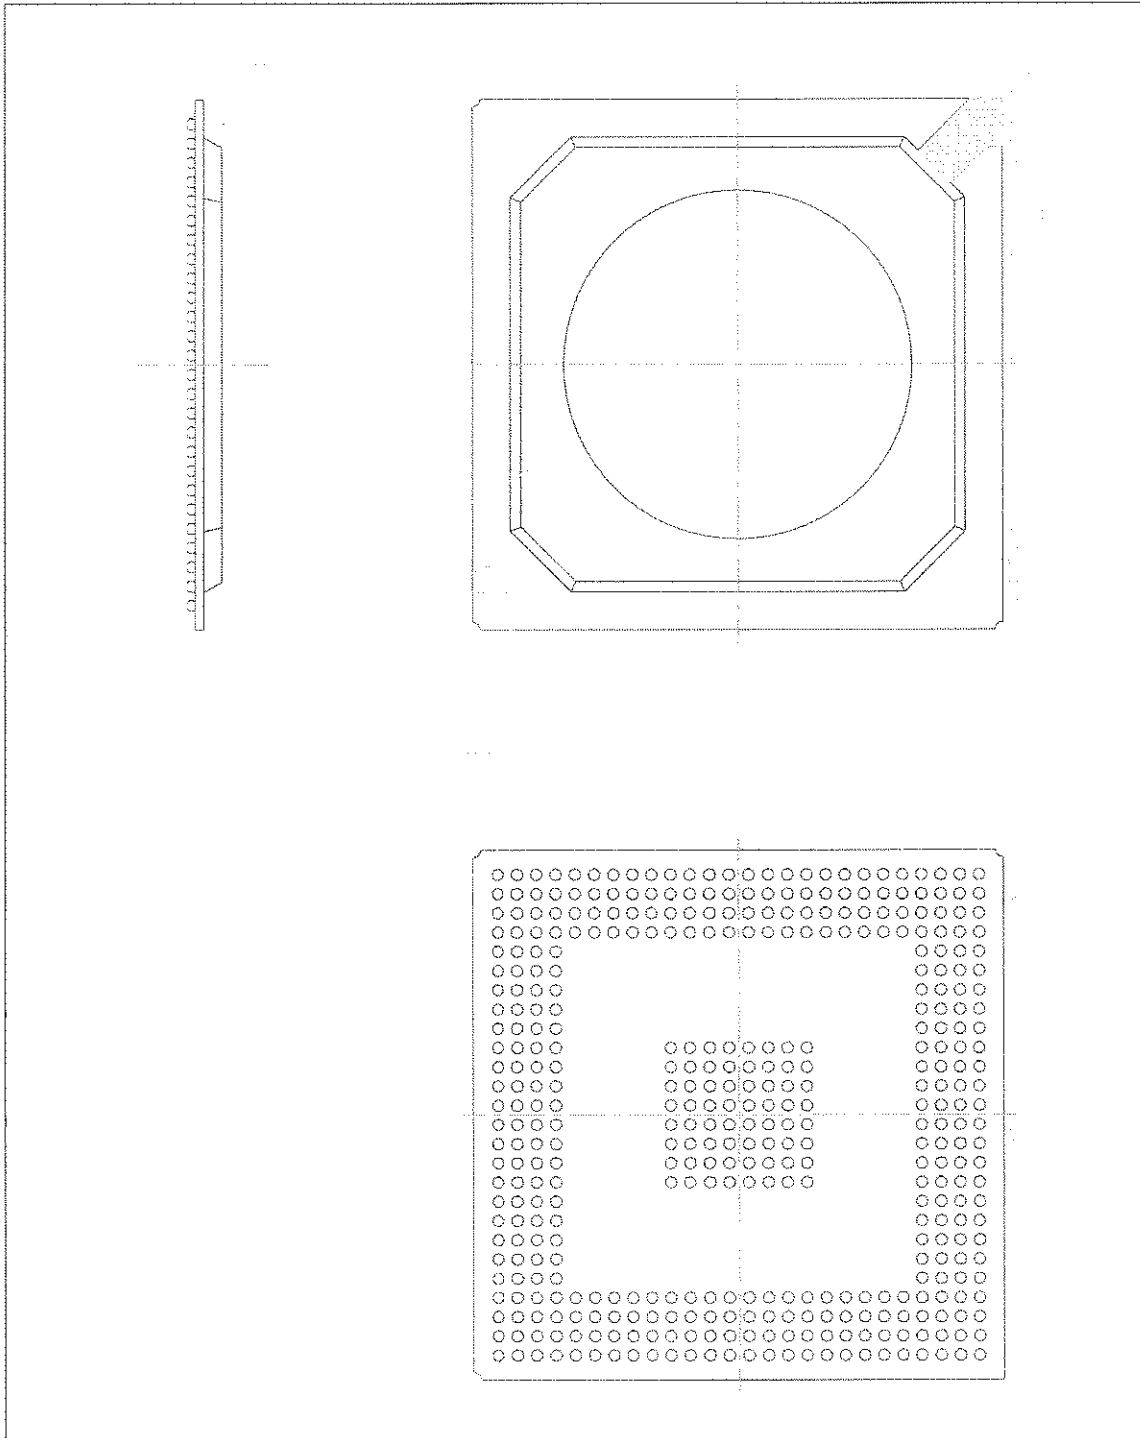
FLI30336 416-PBGA MECHANICAL DRAWING
